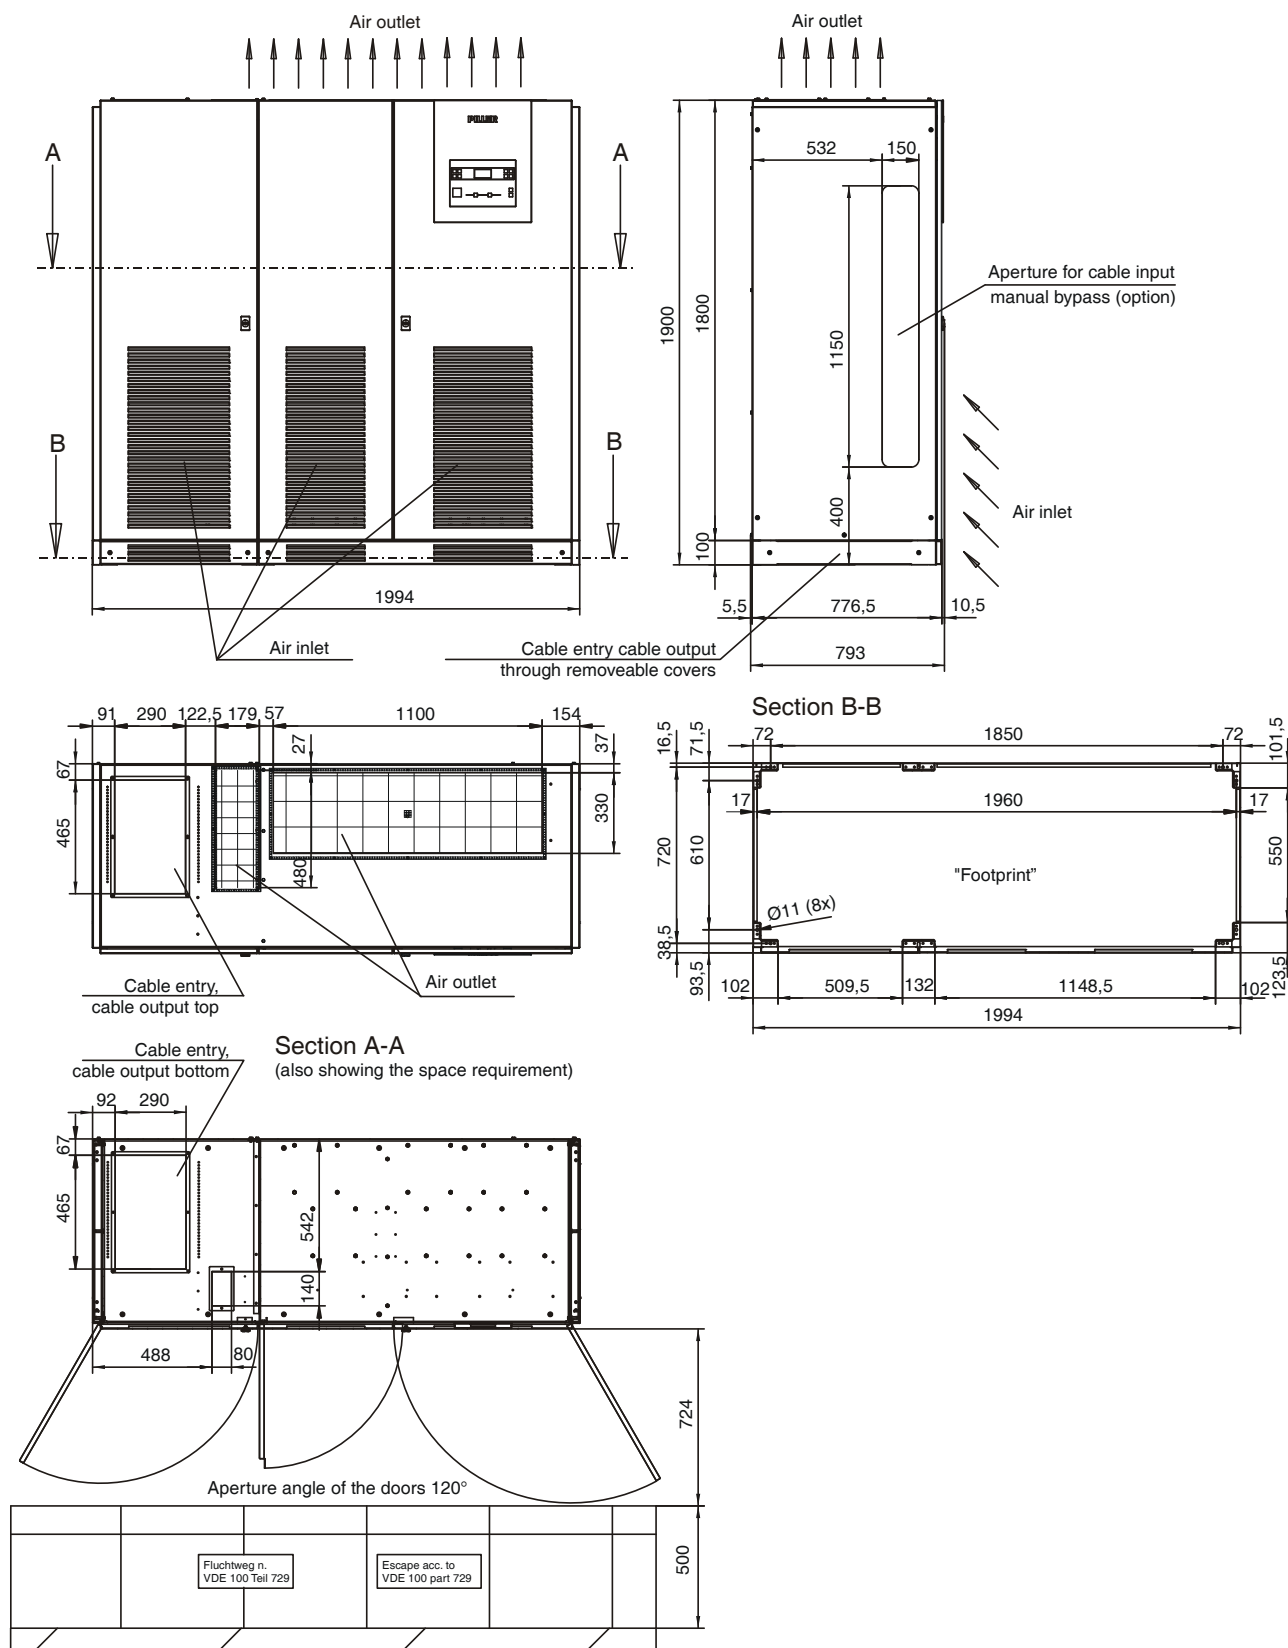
APOCONV 400 kVA dimensions and space requirements
